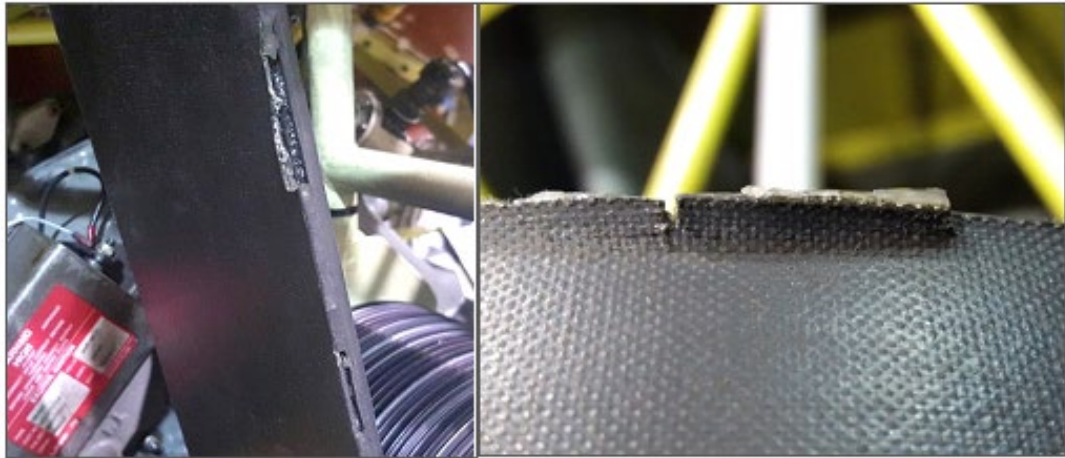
Drive Belt Visual Inspection – Sealed Belt Edges
